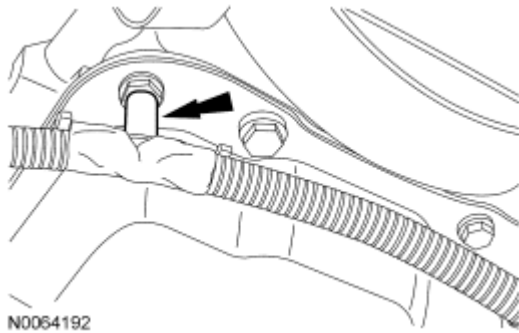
Detaching Wiring Harness Retainer From Oil Pan Stud Bolt
